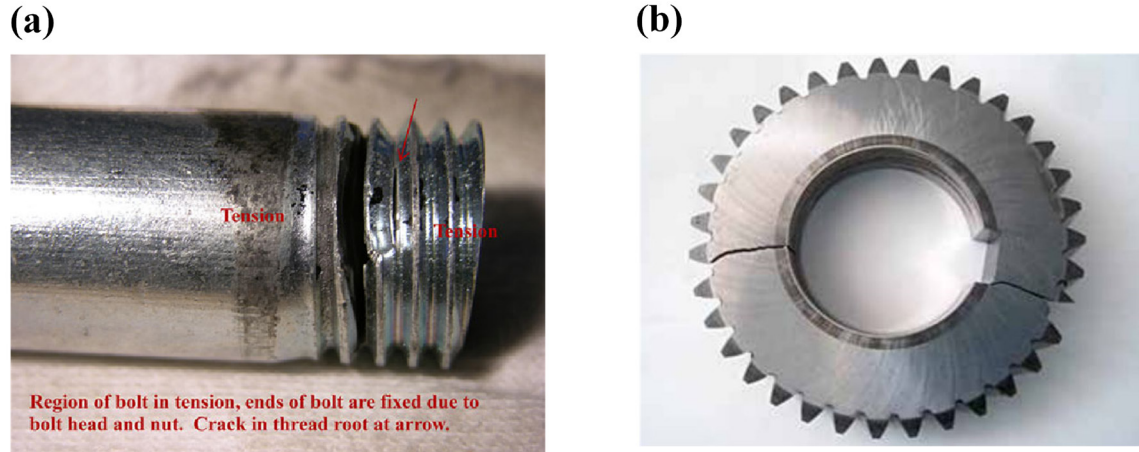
(a) Failures bolt thread due to shear stress (Reitz, 2013) and (b) crane gearbox failure (Reed, 2016).
